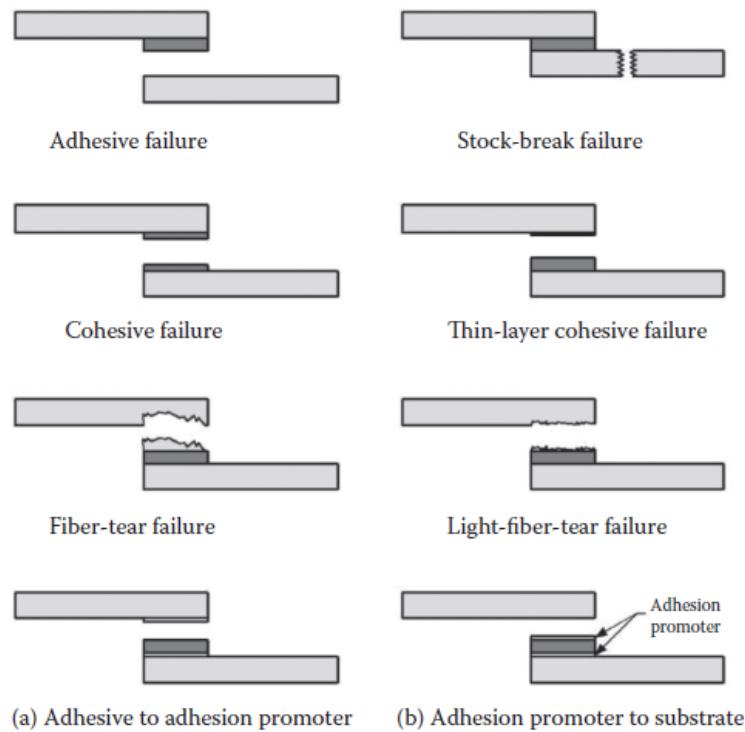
Failure modes for adhesively connection a) concrete-filled FRP girder and b) steel girder (Zoghi 2013)
